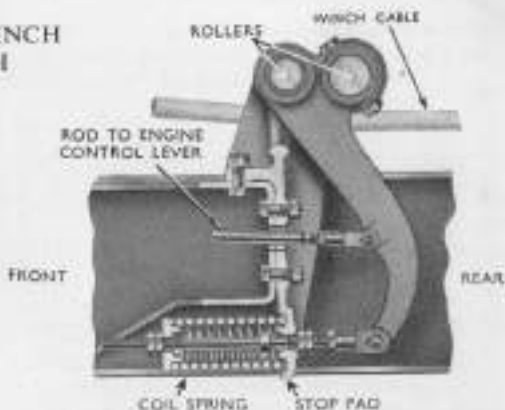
Winch Tensioner Engine Control Trip Gear.
